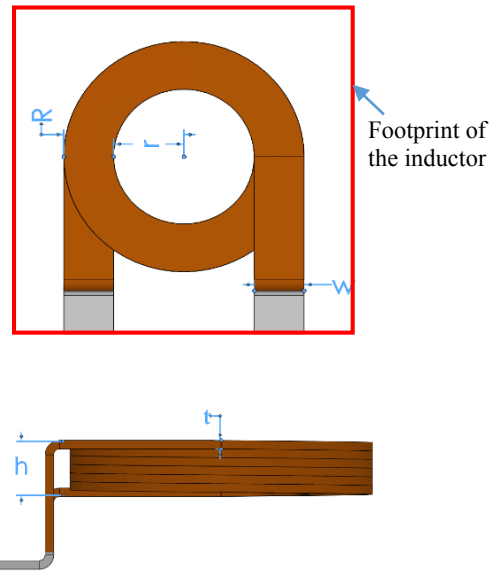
Dimensions of the Winding (a) Top View (b) Side View
